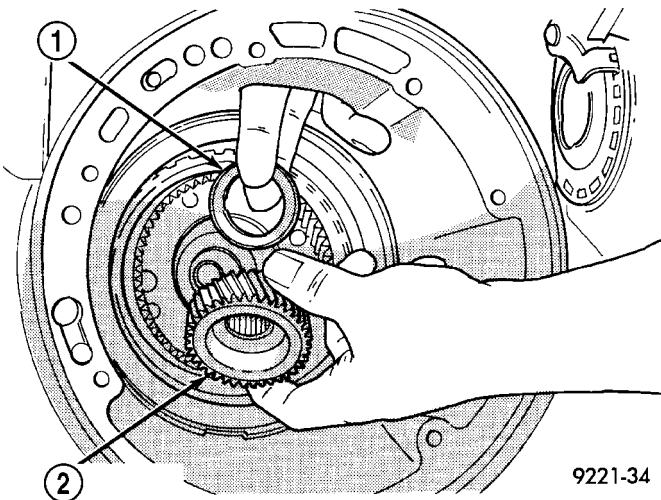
Install Rear Sun Gear and #7 Needle Bearing
